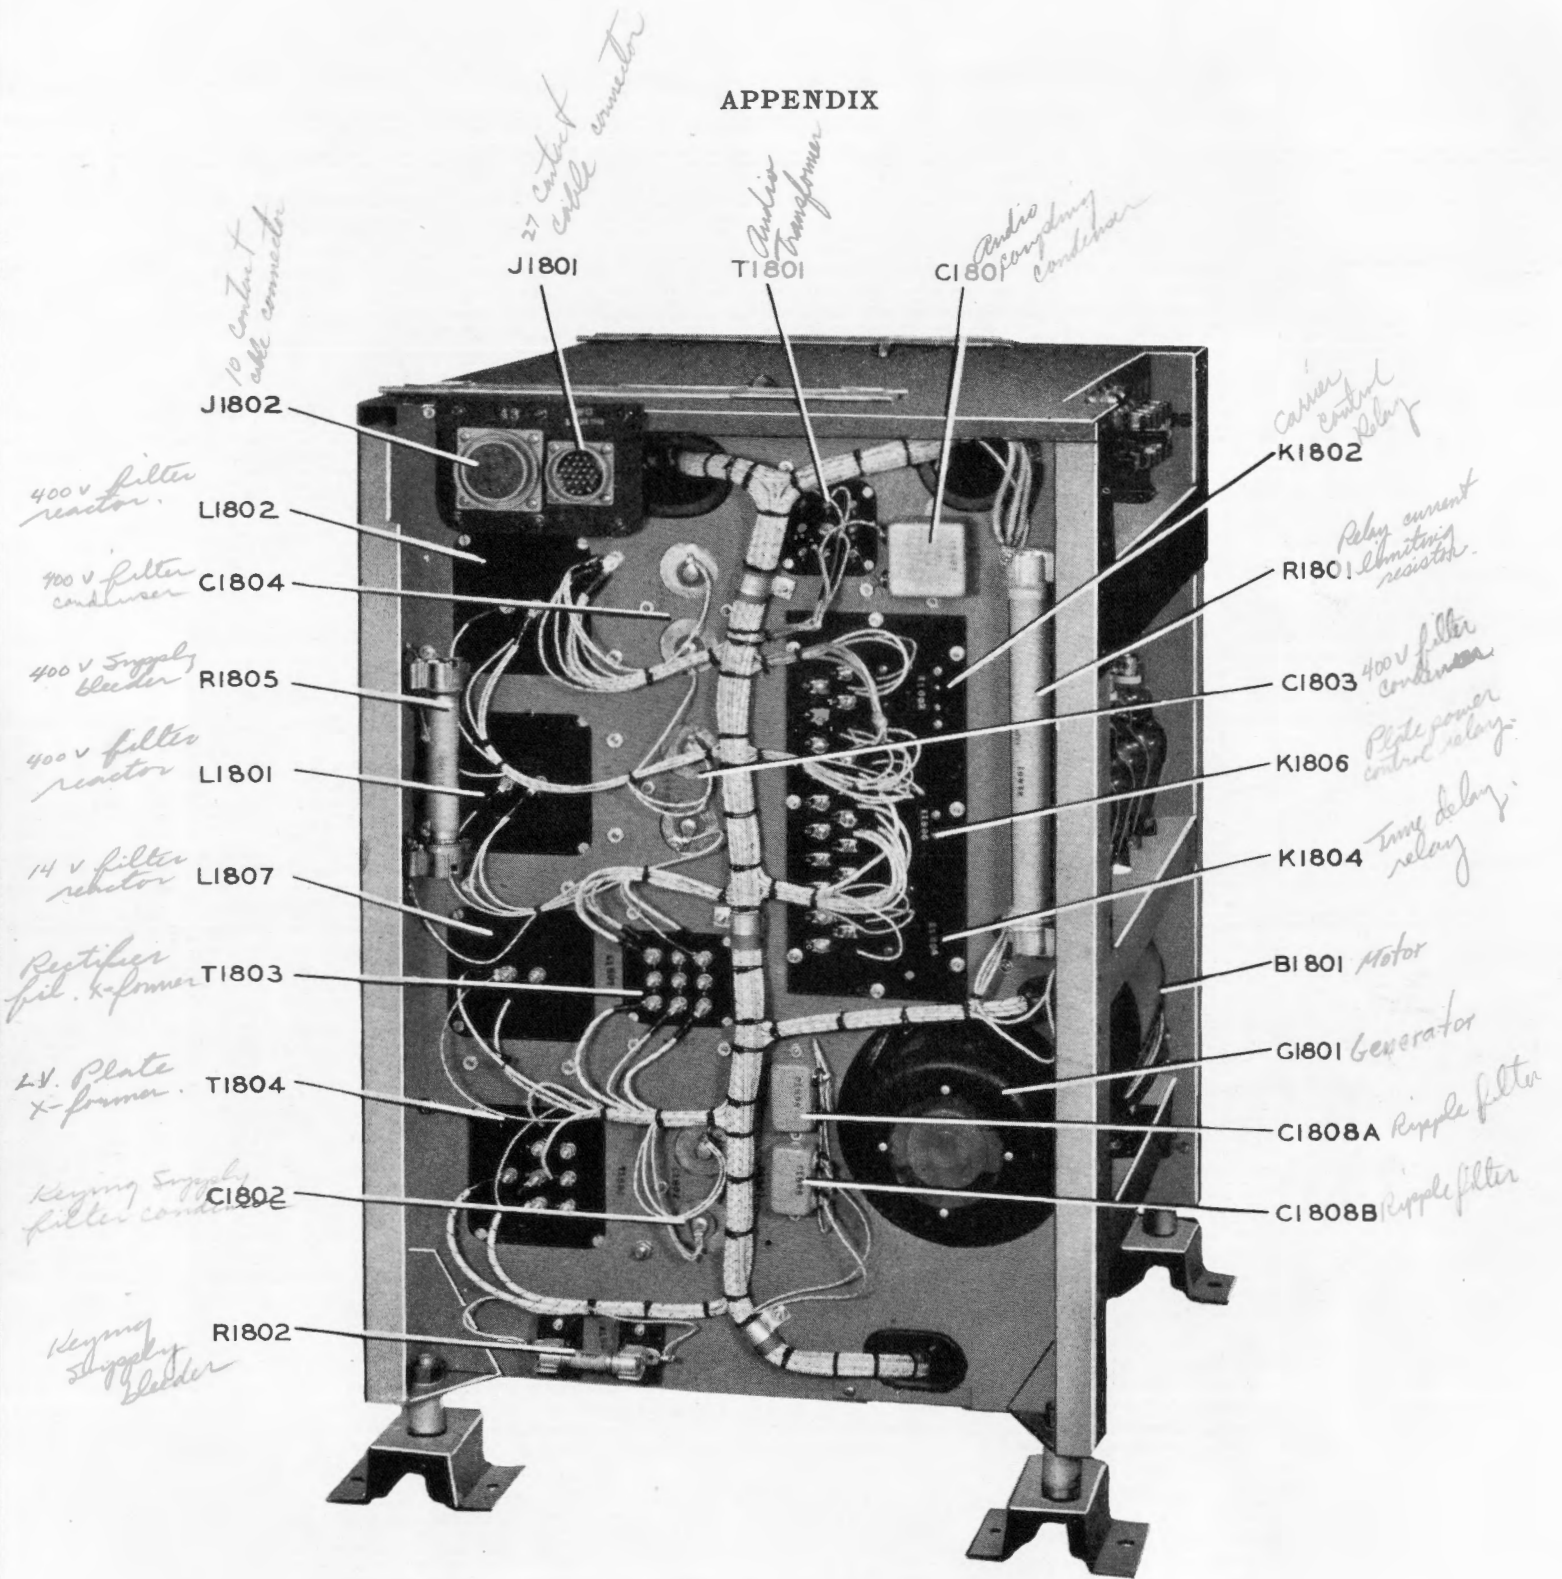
Type COL-211101 Motor-Generator-Rectifier Power Unit
